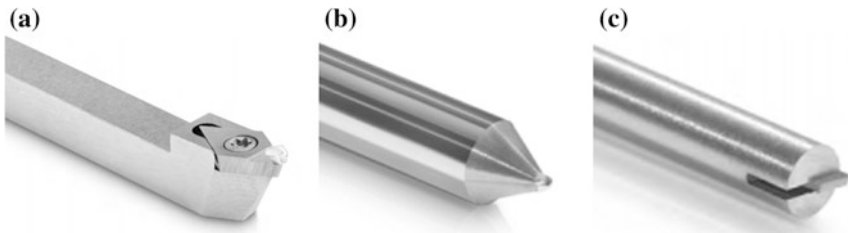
Typical diamond tools for (a) diamond turning (lens tool), (b) ball end milling, and (c) toric milling tool. *Courtesy Contour Fine Tooling Company
